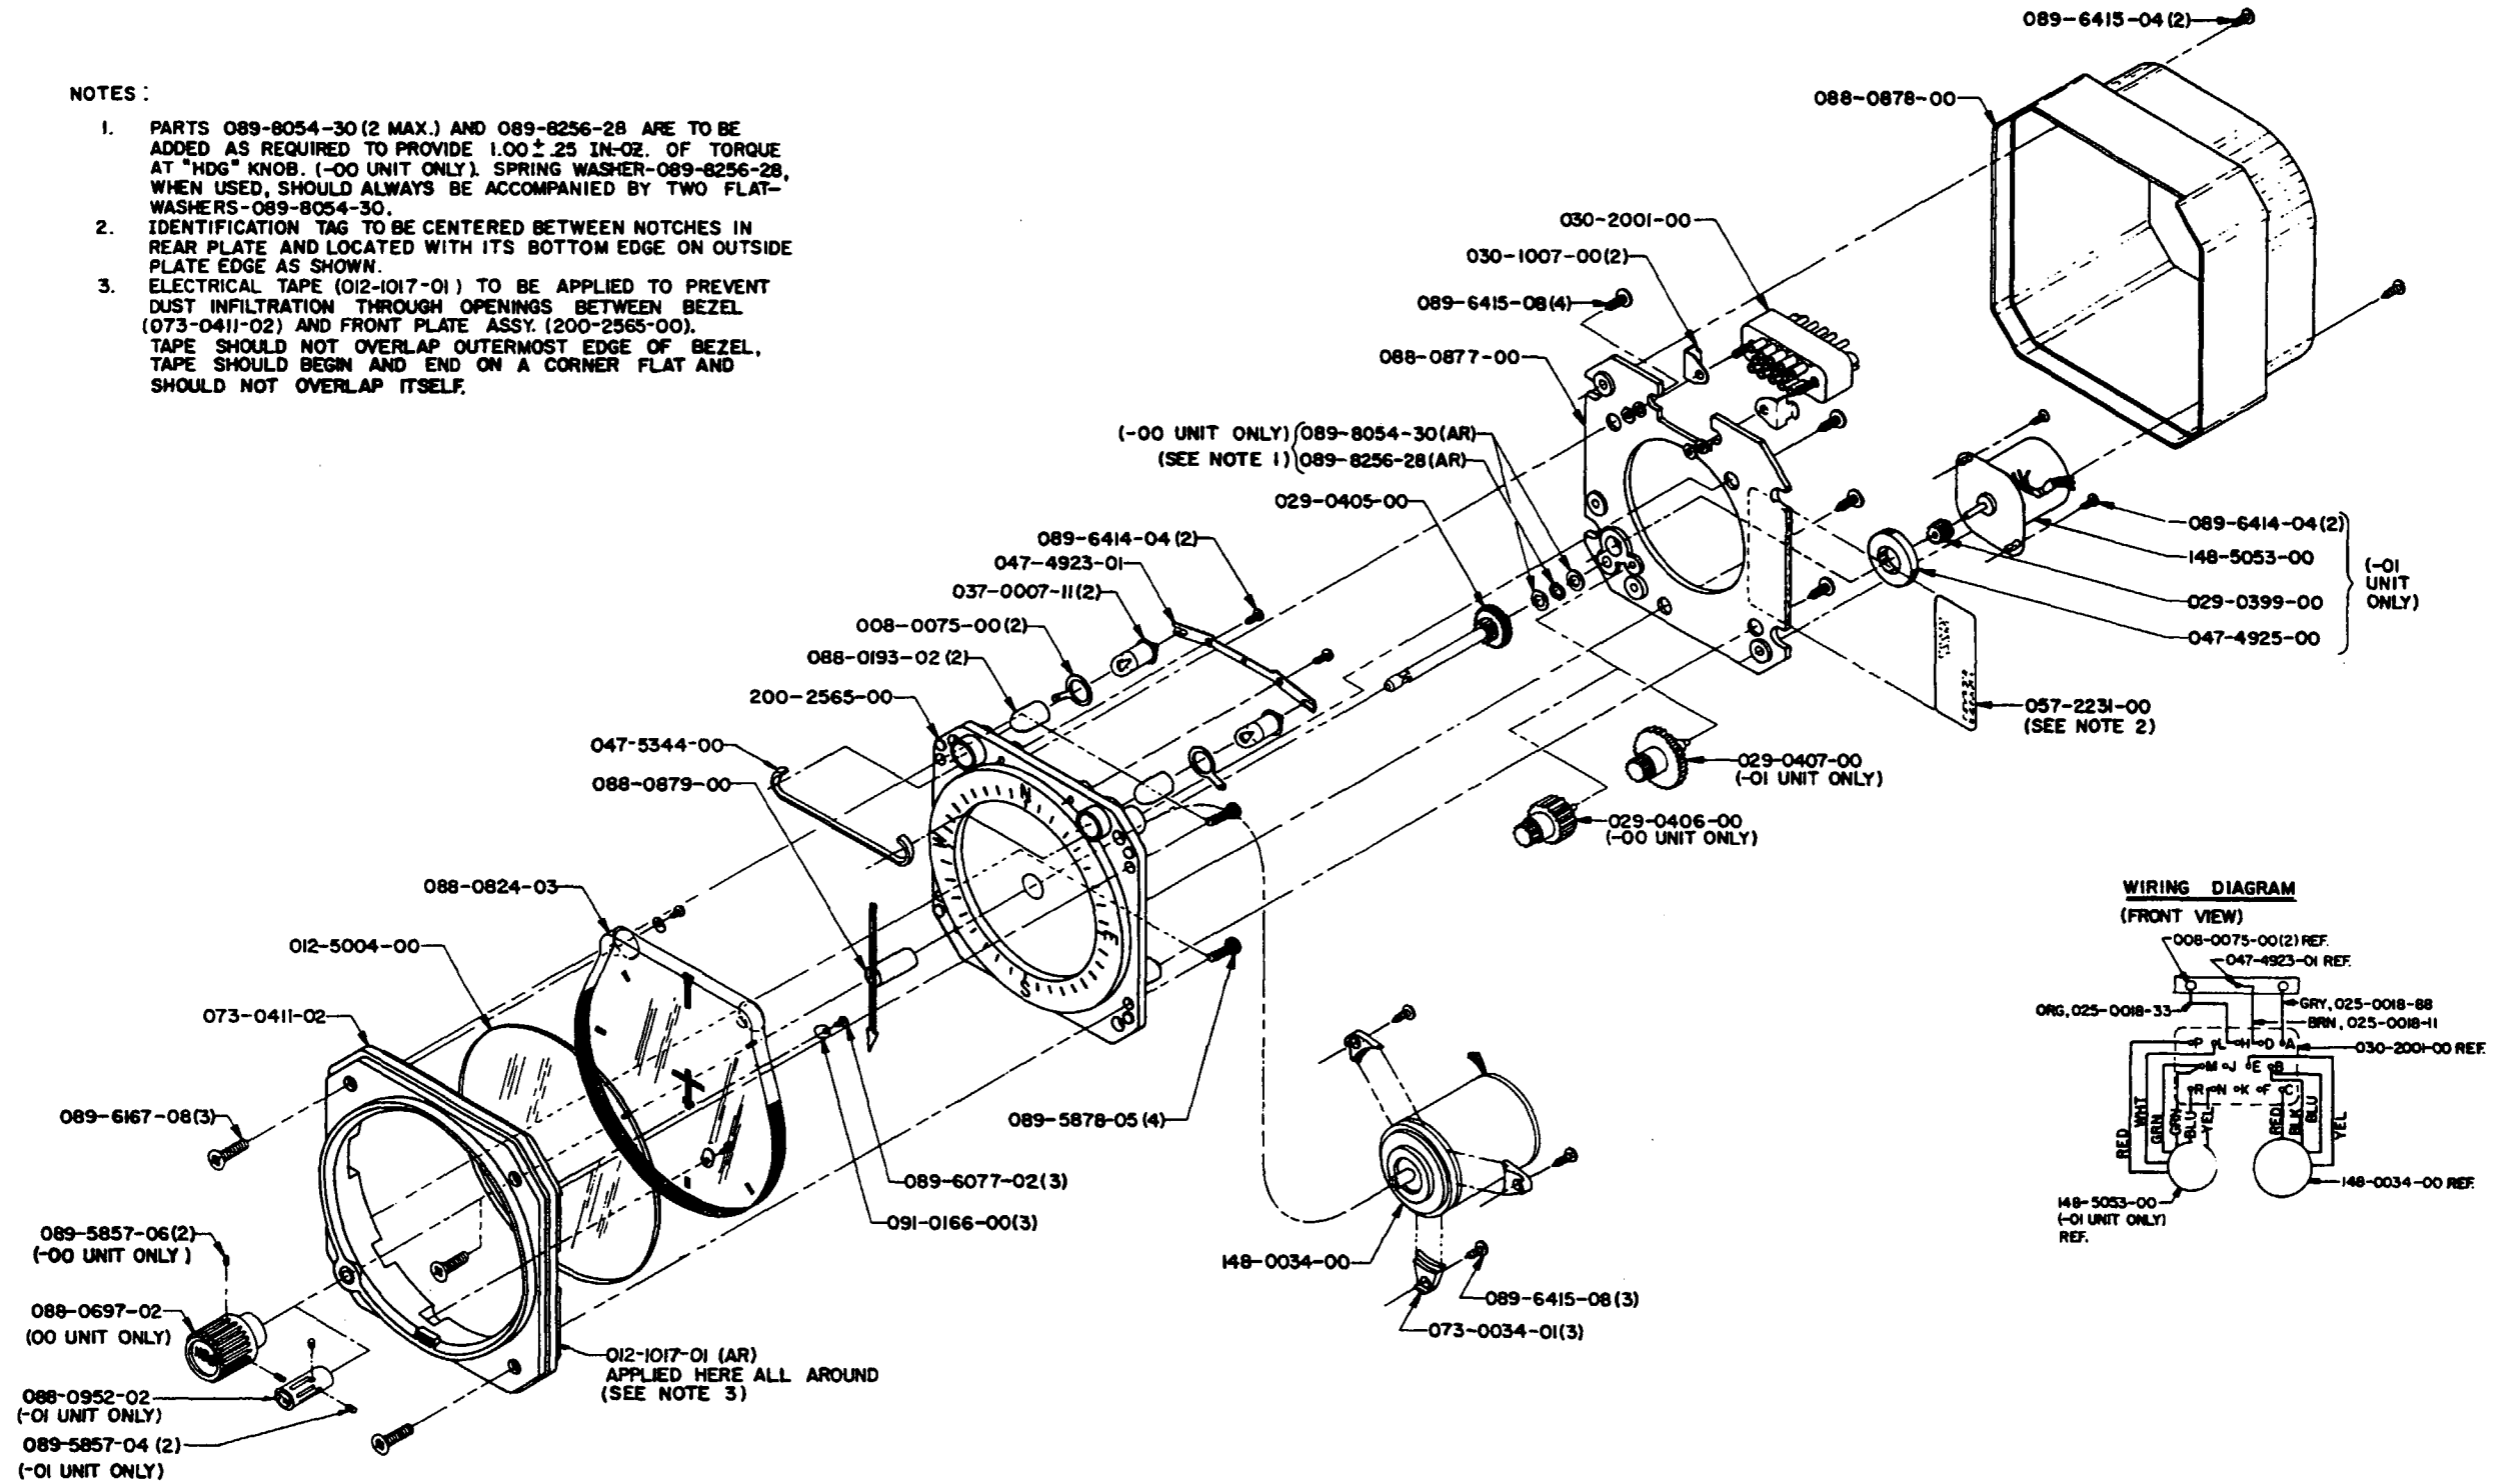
B KI 227B FINAL ASSEMBLY
